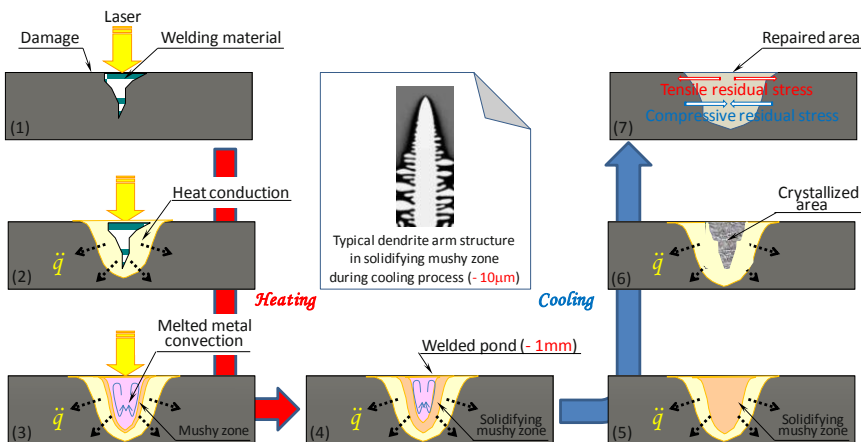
Fundamental phenomena in a laser welding process.
